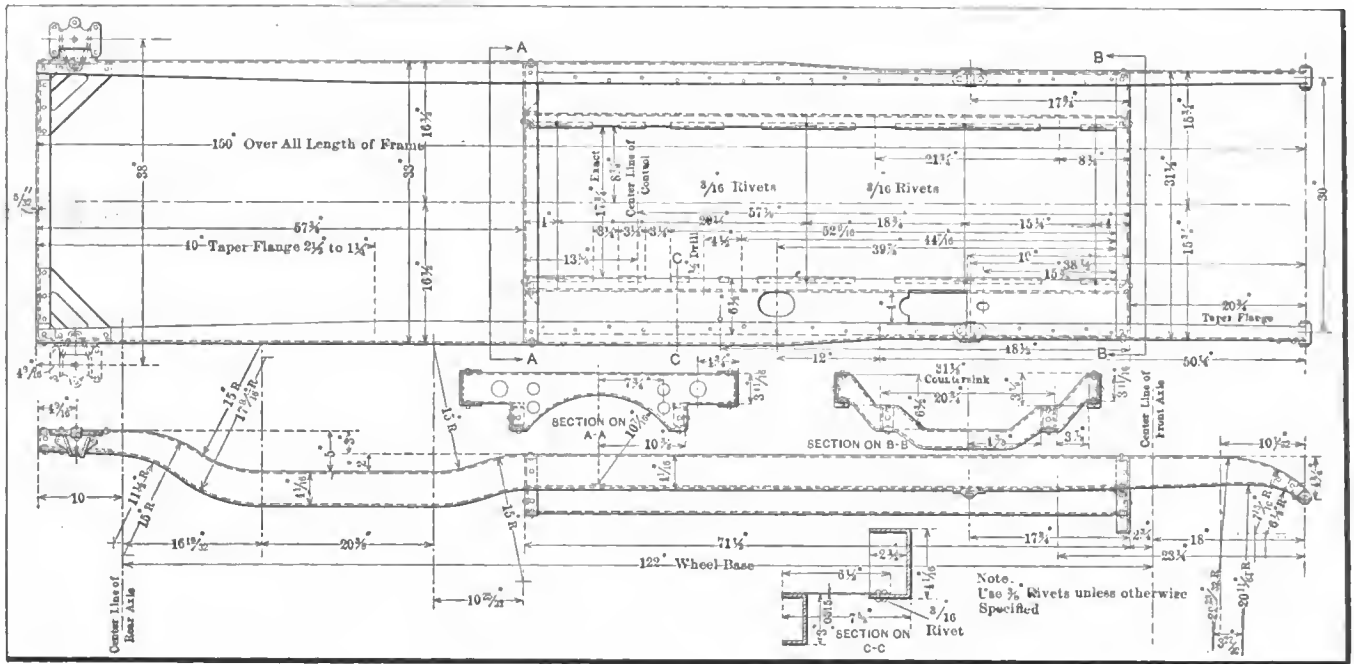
Chalmers-Detroit frame in plan and elevation, with double drop rear and narrowed in front
